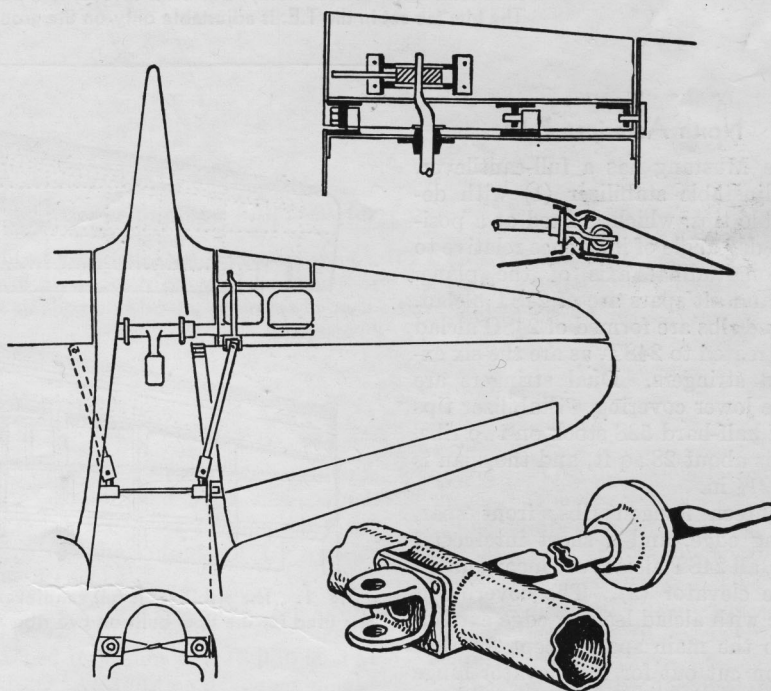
Details of the elevator trim tab controls, cable-operated from fuselage. The universal joints, shown in the plan view, are interconnected by cable as shown in detail (lower left). The tabs are operated by small cranks engaging a sliding bar encased in a slotted tube attached to the tab by angle brackets at each end.
